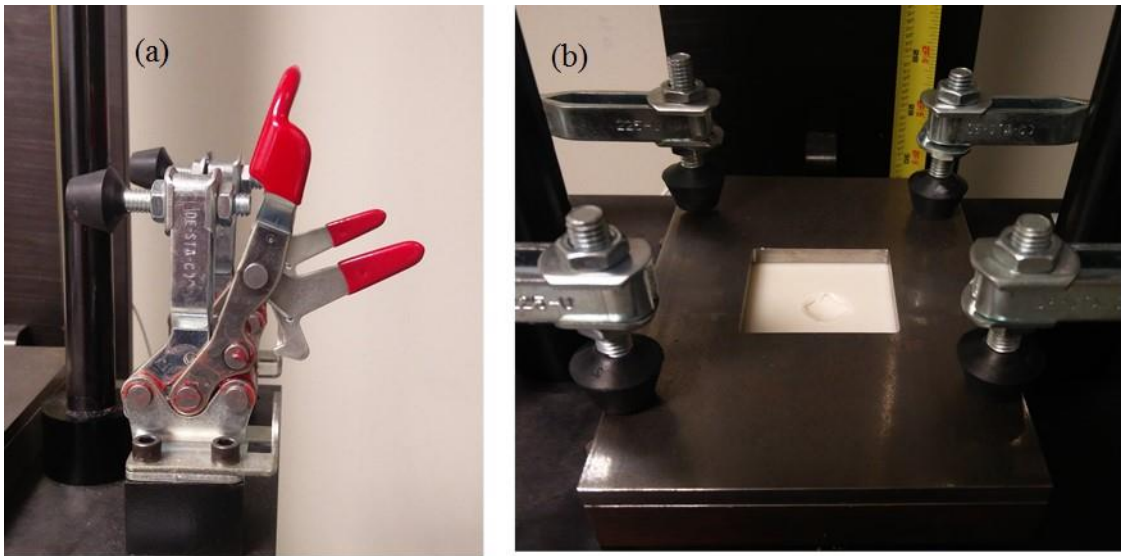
(a) The toggle clamp and (b) body fixture.
